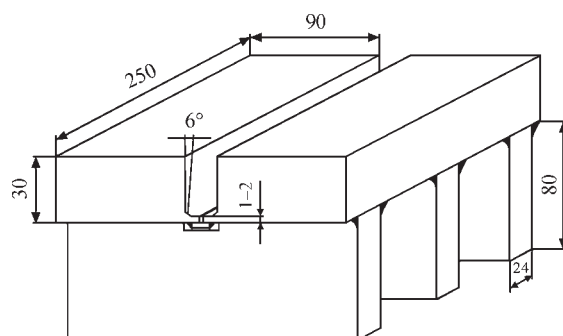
Rigid sample for making butt welded joint of CA-6NM steel
